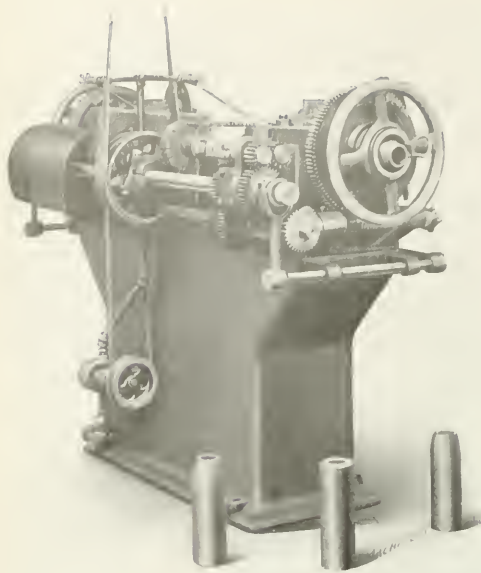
View of Thread Milling Machine illustrating Driving Mechanism for Cutter- and Work-spindles
